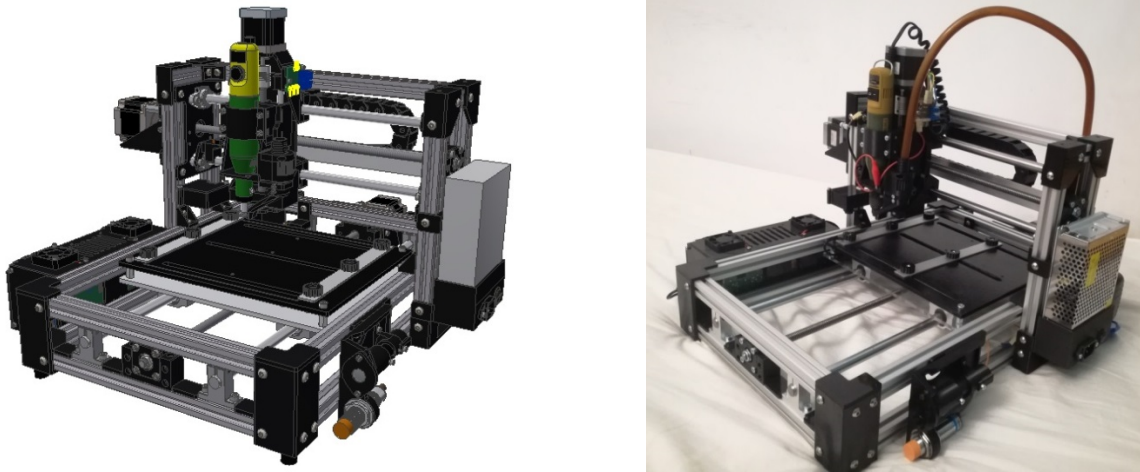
PCB printer Autodesk Inventor model (left) and its physical realization (right).
